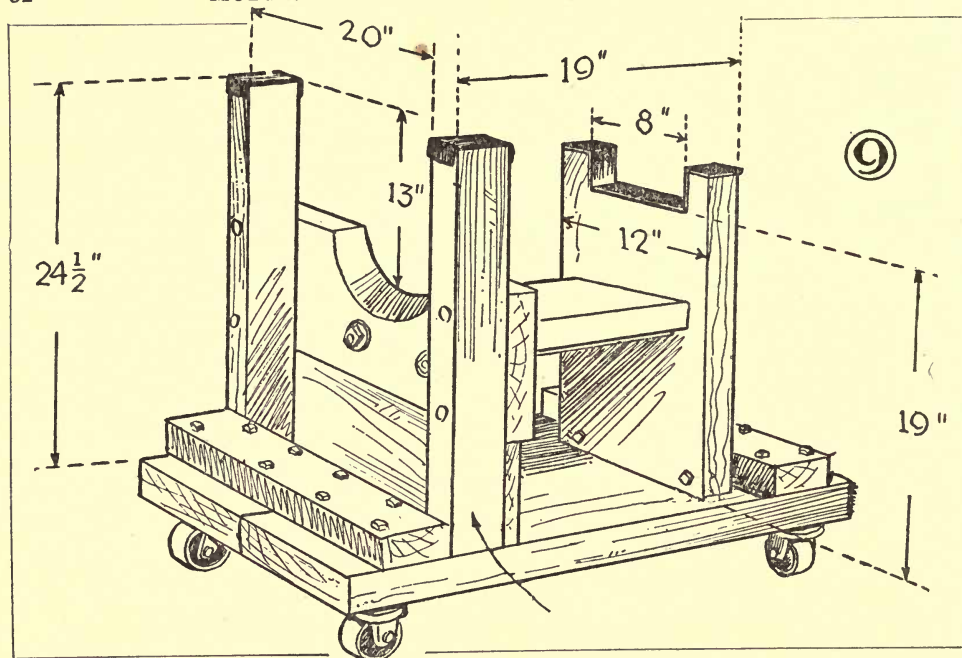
Wooden engine stand for holding the assembled engine in its natural position
